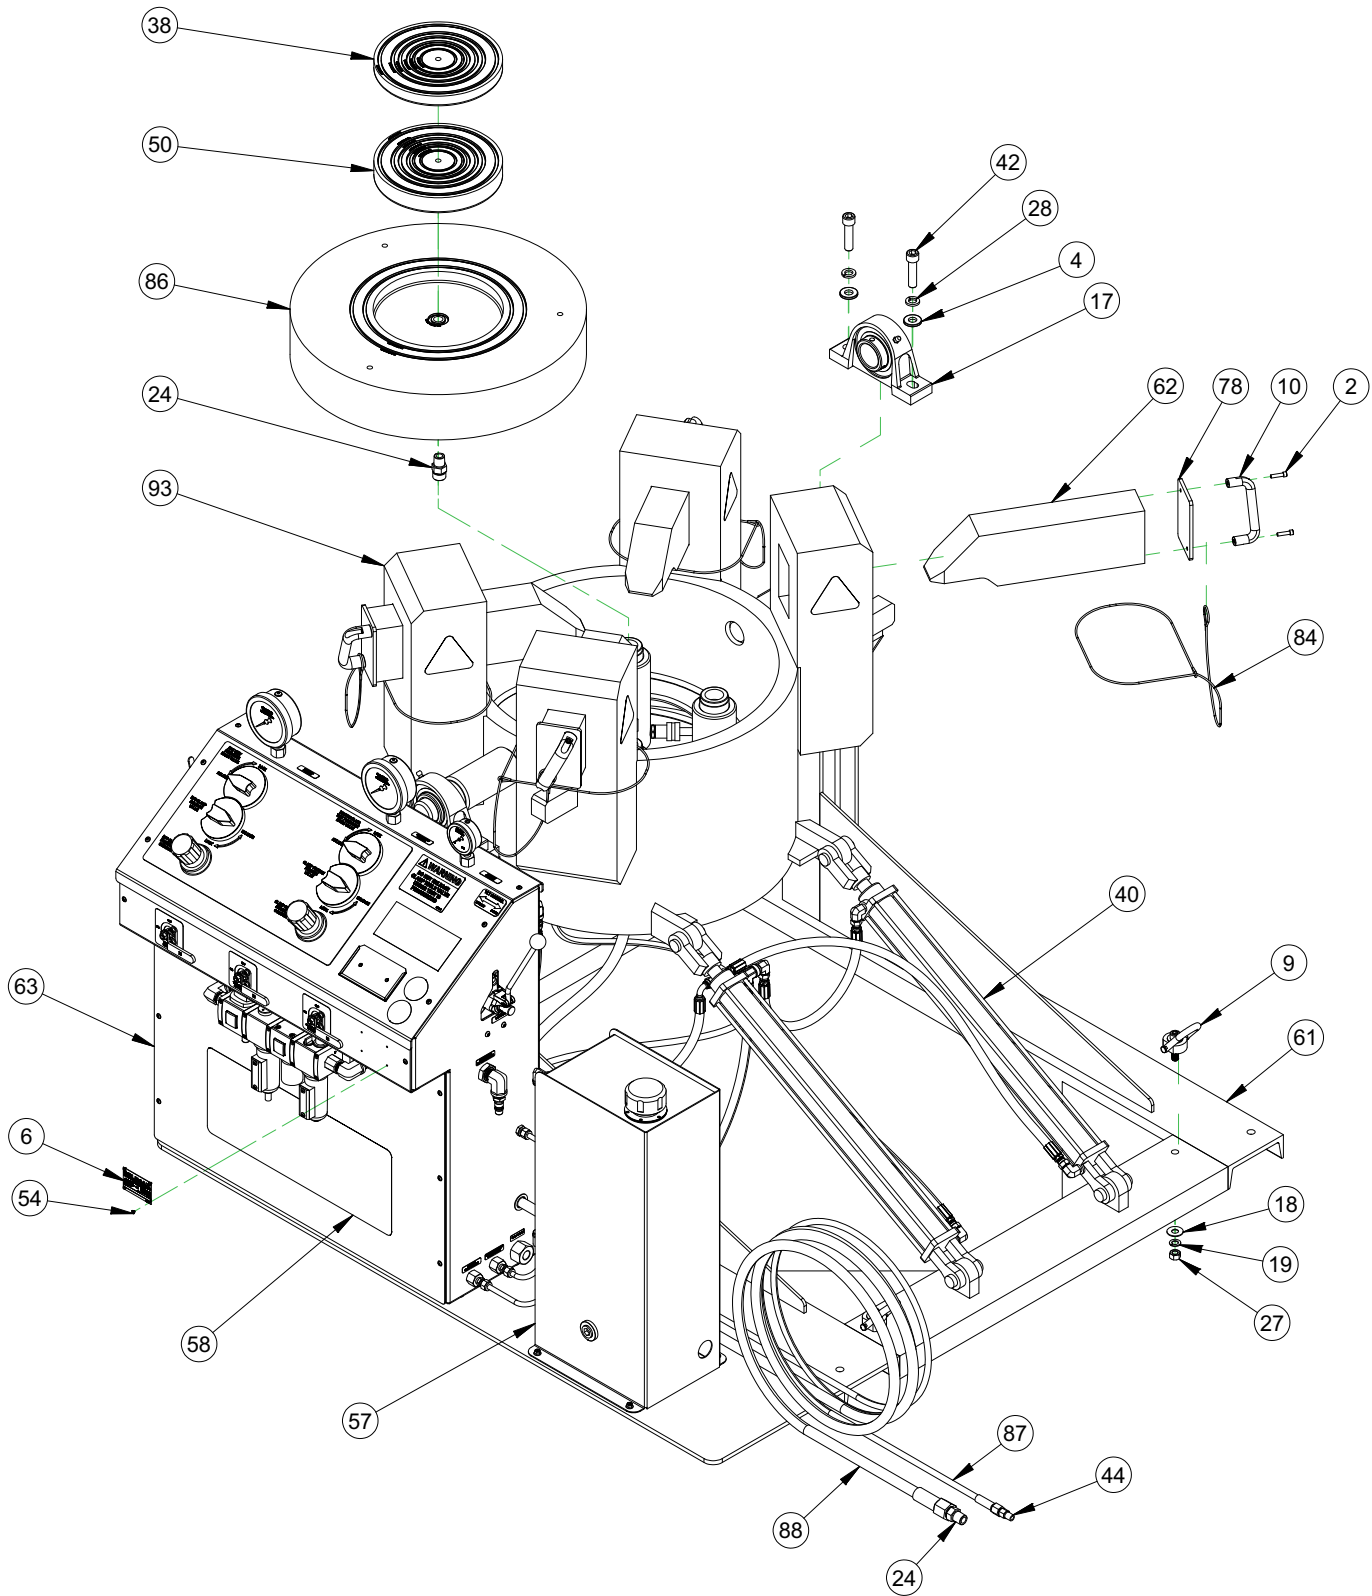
UFV-12-100T VALVE TESTER ASSEMBLY (P/N 88847)
